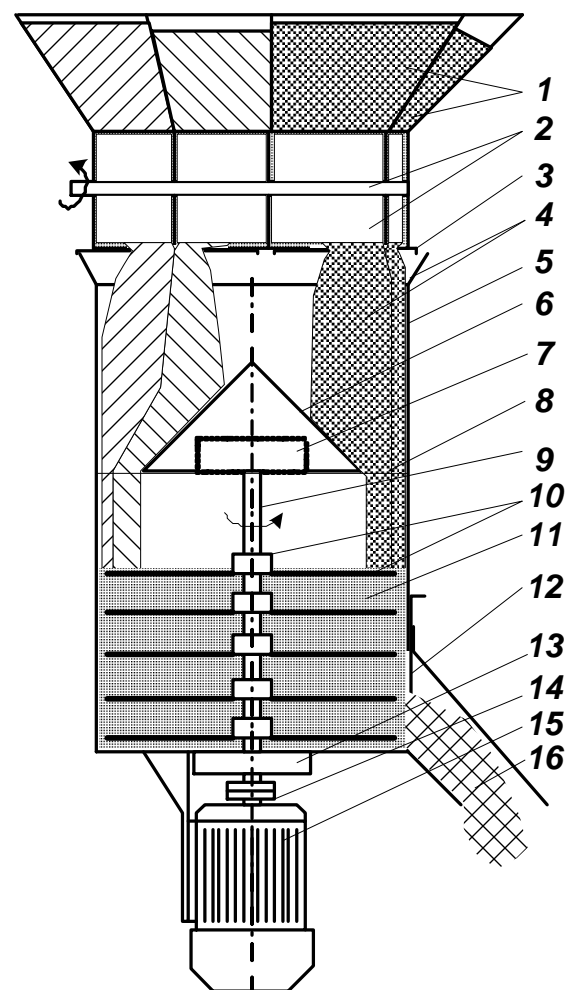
Technological scheme of the mixer: 1– batcher with components of the mixture; 2– metering devices of a multicomponent dispenser; 3– metering shutters; 4– guide cone; 5– walls of the mixing tank; 6– guide cone; 7– upper bearing support; 8– cone supports; 9– shaft; 10 - paddle mixer; 11– components during mixing; 12– slide valve; 13– lower bearing support; 14– joint; 15– electric motor; 16– discharge tray with the finished mixture
